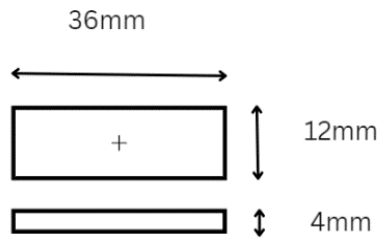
Specimen prototype for the ILSS test based on ASTM D2344
